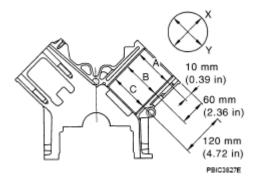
Identifying Cylinder Dimension Courtesy of NISSAN MOTOR CO., U.S.A.
